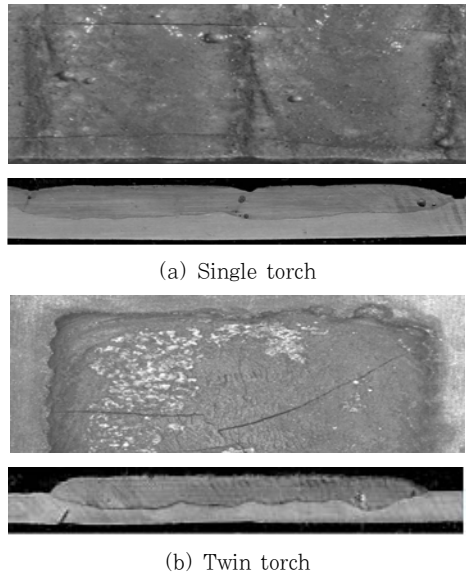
Top view and cross section by single and twin torch welding
